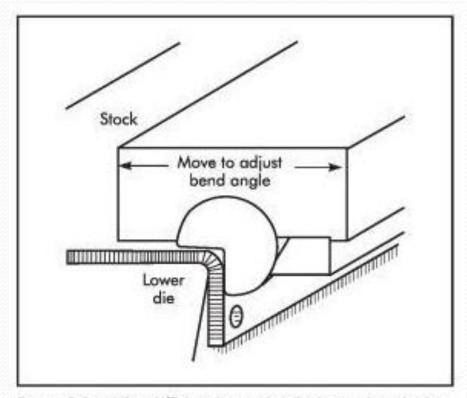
A Ready[™] bender overbends the stock at the bottom of the stroke to provide for springback. (Courtesy Ready Tools, Inc.)
